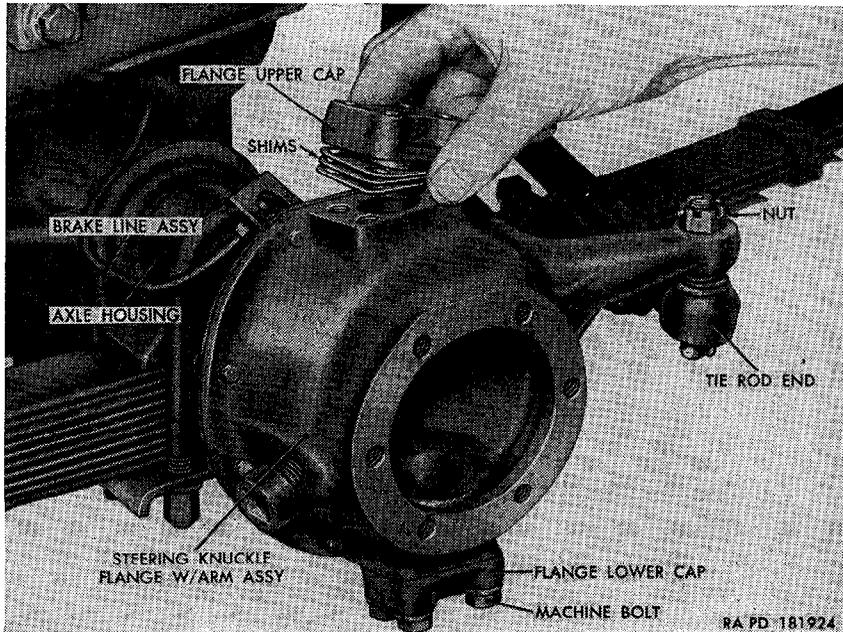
Removing flange upper cap and shims from right steering knuckle flange.
